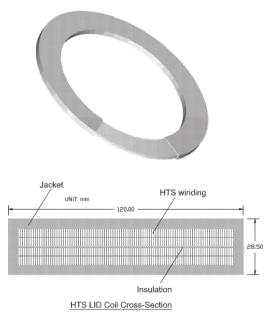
A schematic drawing of the HTS coil and the cross section of the coil winding.
